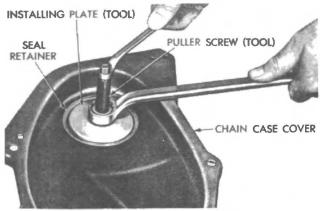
Installing new seal (Tool CA-3506). 60x763
